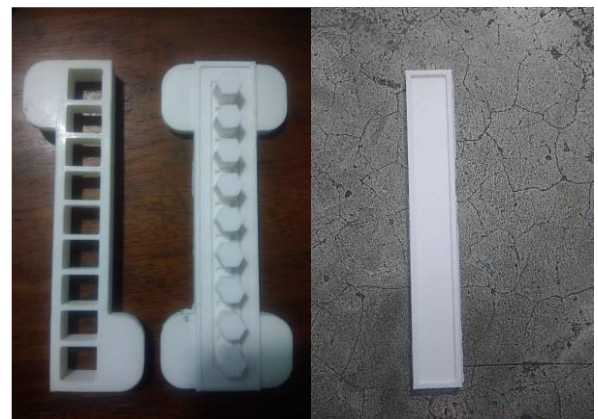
The 3d printed mold parts, (a) The 2-part main body mold & (b) the base mold.
